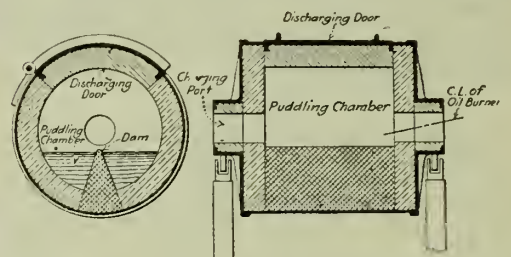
PUDDLING FURNACE INCORPORATING THE PRINCIPLE OF MIXING BY THE DAM SHOWN. THE BALL IS REMOVED BY THE DISCHARGING DOOR.
